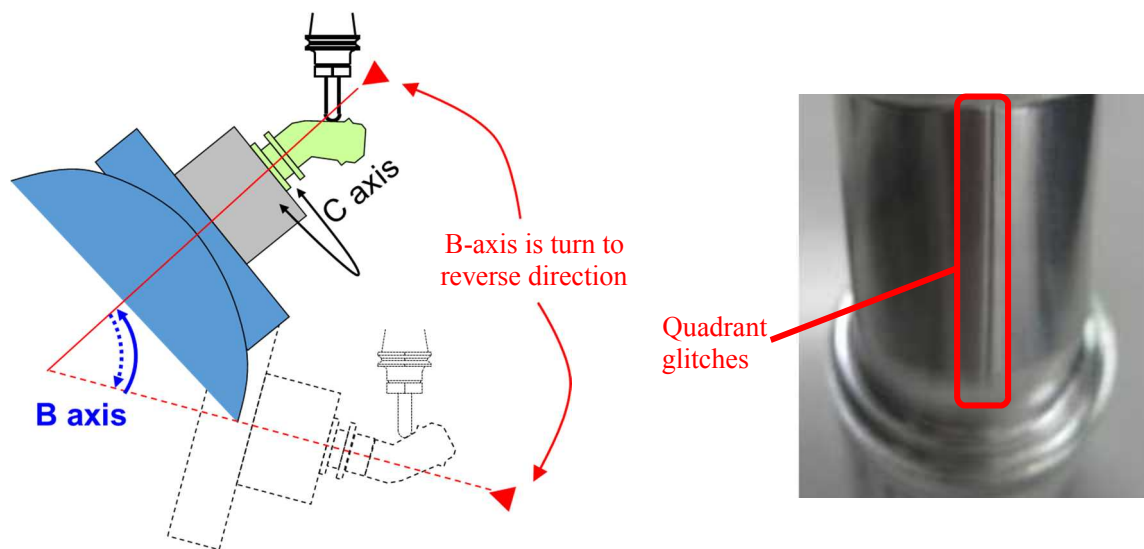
Quadrant glitch caused by B-axis turning to reverse direction during simultaneous 5-axis machining
